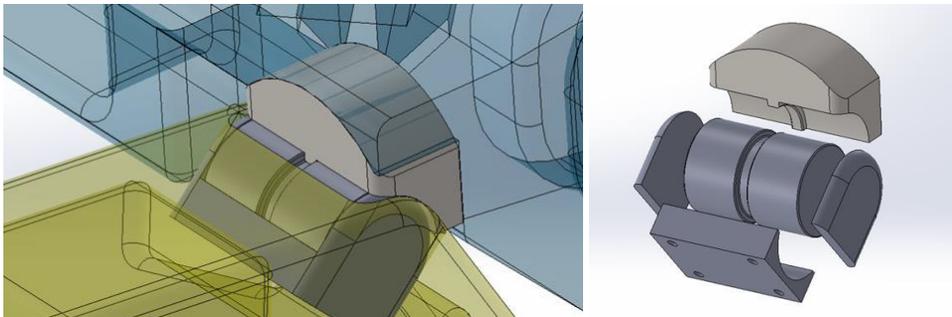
Left: transparent view of the joint used in the 4L bogie. Right: exploded view of the consumables, made of a few components of low cost.
